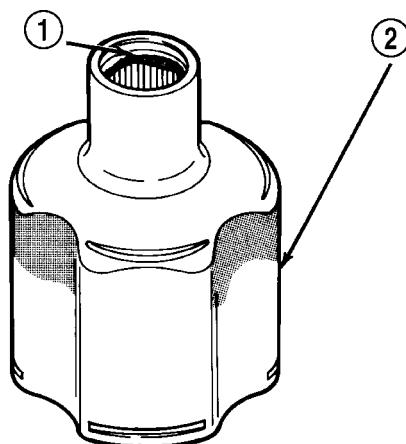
Tripod Joint Retaining Circlip And O-Ring Seal
